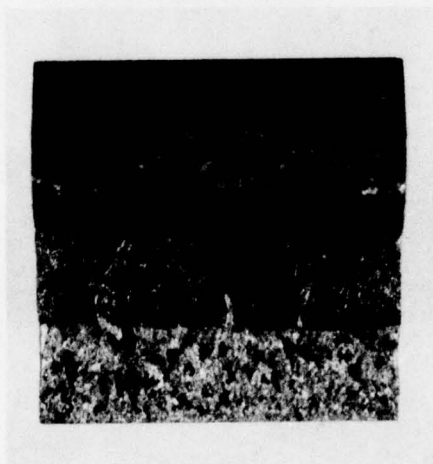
Charpy specimen D2-2 fracture surface
